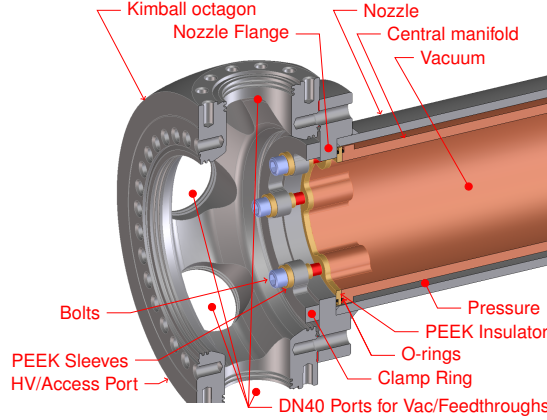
Central Manifold/ Nozzle Flange Seal
